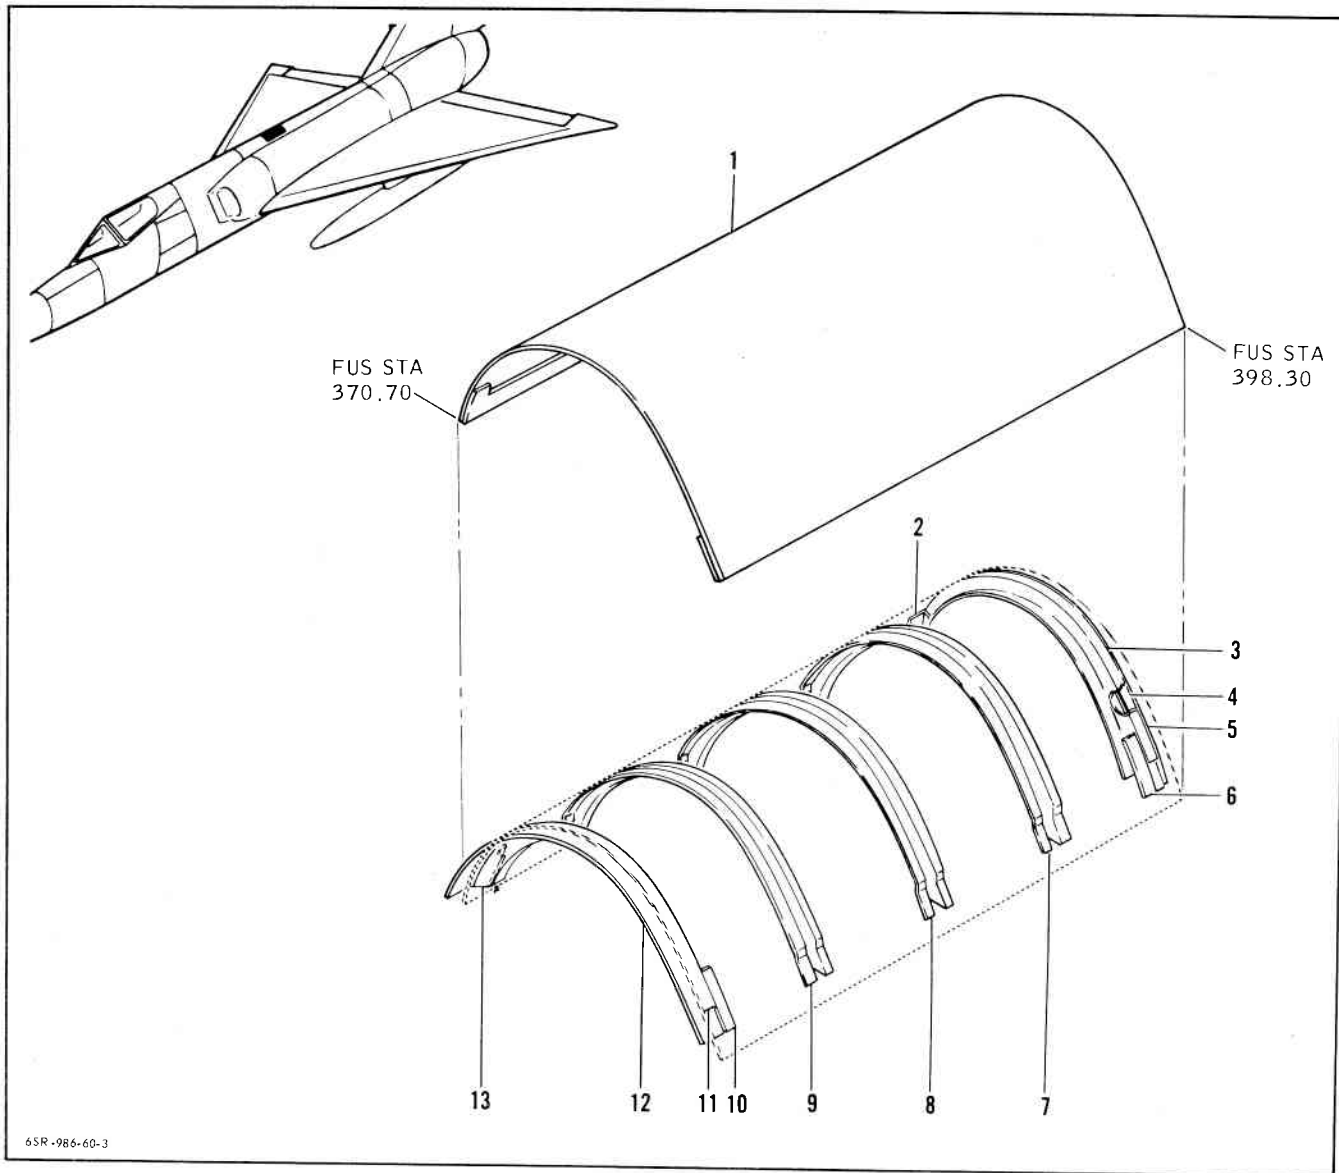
E. Aerial Refueling Adjacent Area Structure F-106A and F-106B (Sheet 1 of 6)
